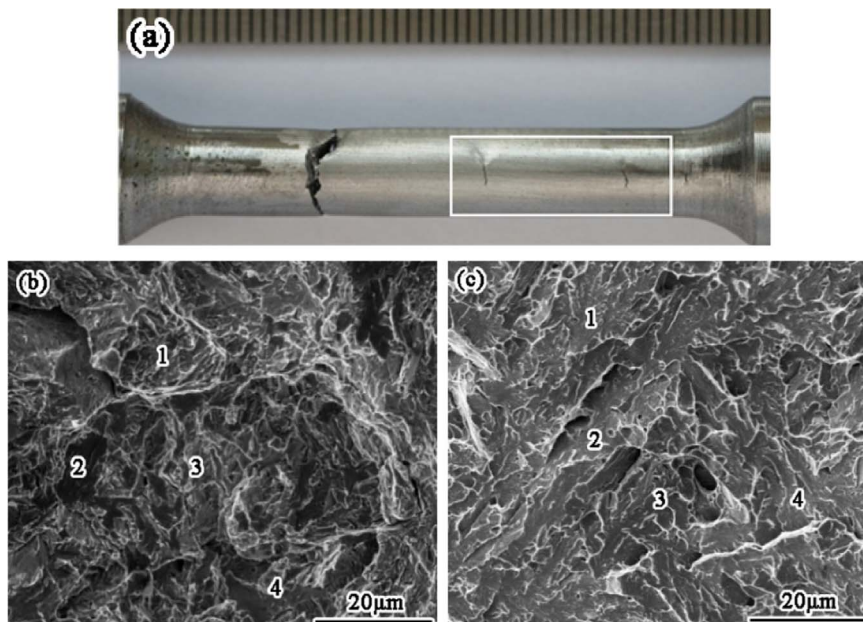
Tensile fracture surface of 3# specimen at −50 °C(a) macro-fracture mode, (b) region A, (c) region B.
